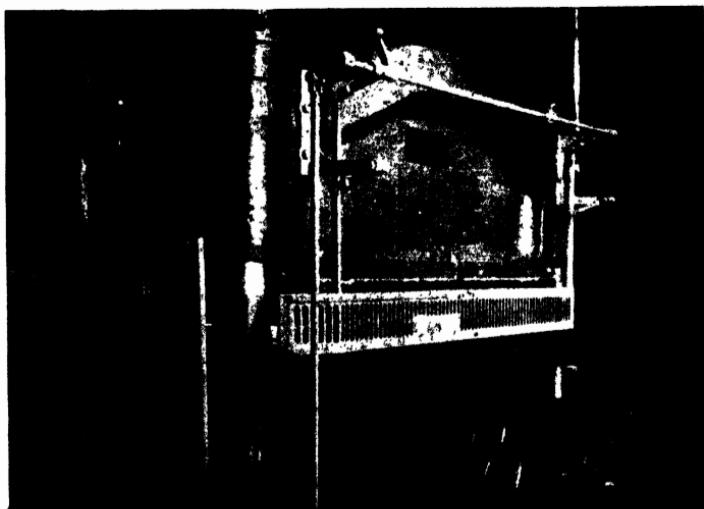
Embossing press guard. (*Courtesy of The Travelers Insurance Company.*)
